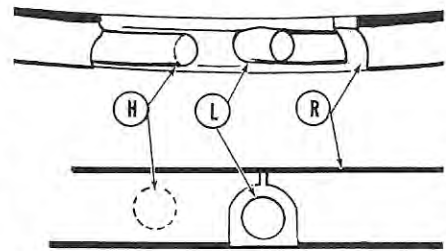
Piston rings are equipped with a retaining lock ring which fits on inside of ring in piston groove as shown. Locking tab is installed to right of locating hole in piston on upper and lower rings, and to left on center ring.
